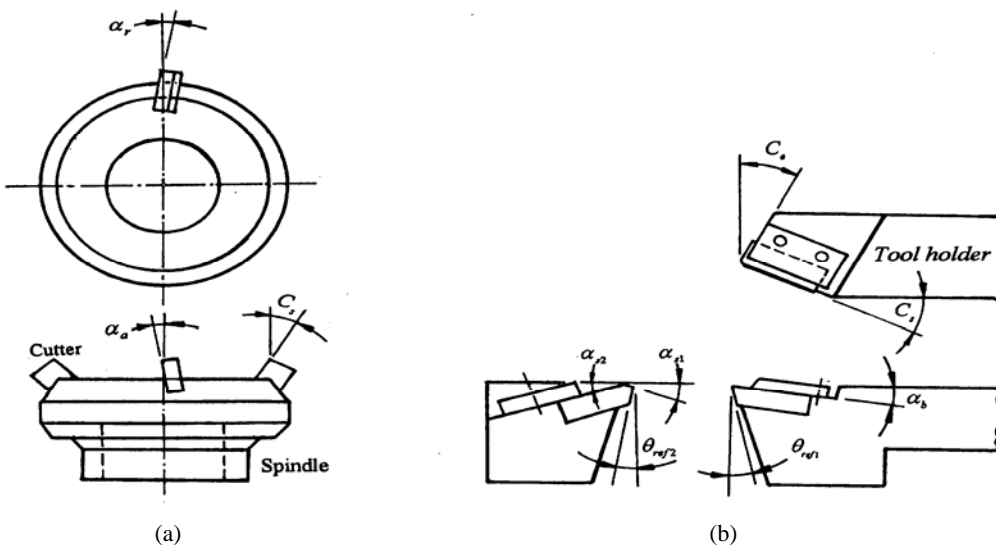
The tool geometrical angles for (a) a milling cutter, and (b) a turning tool
